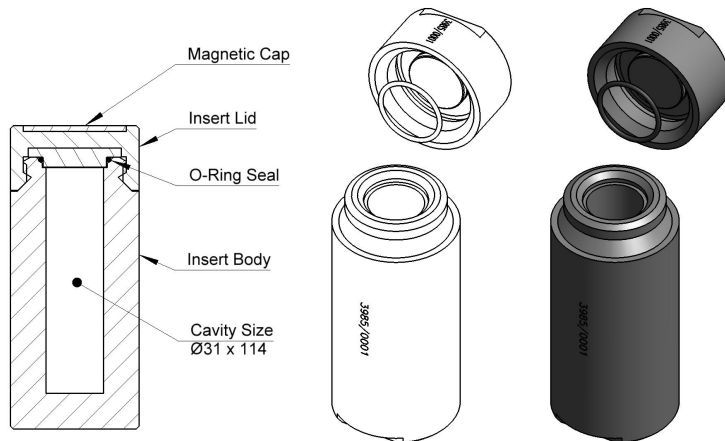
Shielding insert HS-31x114-Tu insert Design # 3985
